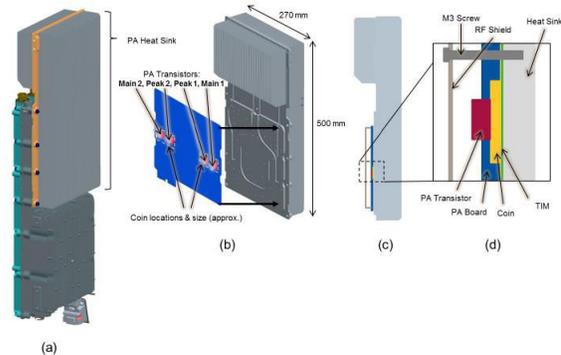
Drawing of the RRH PA assembly used in the present work a) overall RRH with PA heat sink indicated, b) PA board (transistors in red) and PA contact interface with heat sink, c) side view of assembly showing d) cross-section of assembled component stack-up
